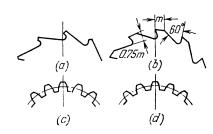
Tooth forms of ratchet wheels employed in machine tools
